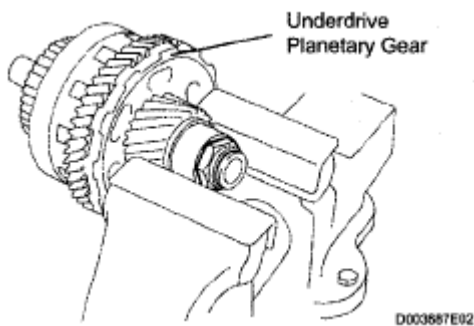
Placing Underdrive Planetary Gear In Soft Jaw Vise
